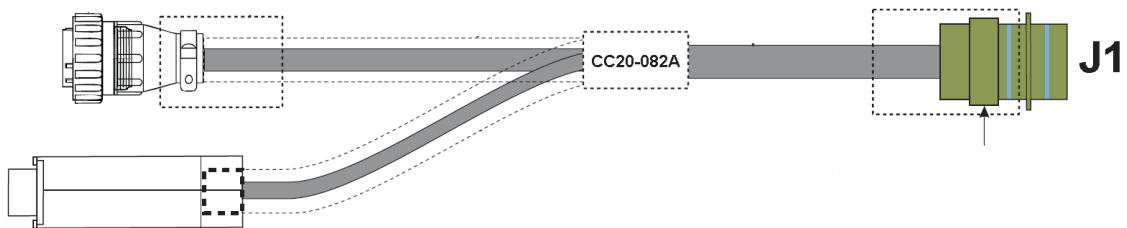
Cable Adapter for Platforms equipped with 7720 Remote Drive Module
